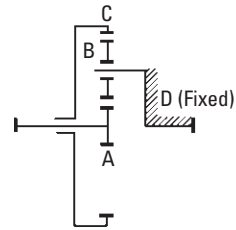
(c) Star Type Planetary Gear Mechanism
